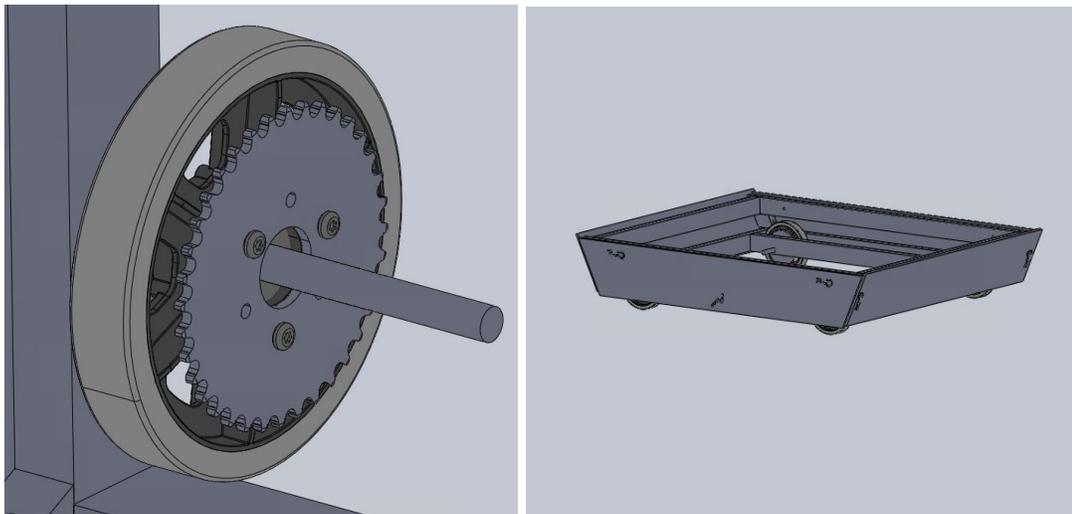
The frame assembly with a trimmed axle and wheel assembly
